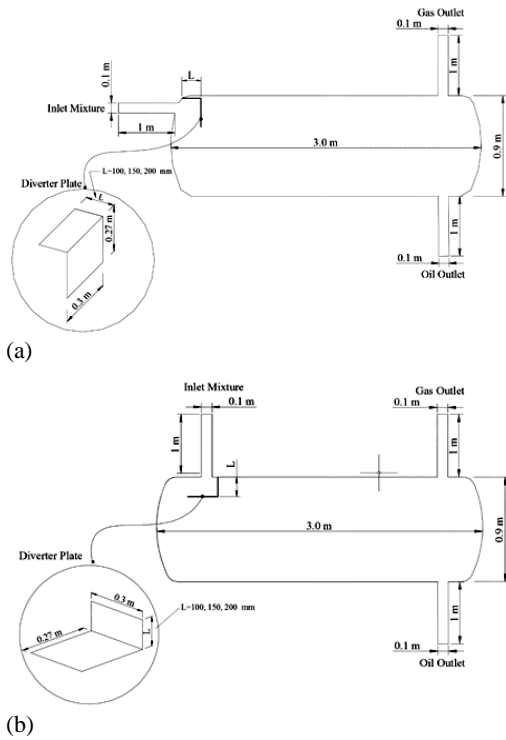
Geometry and dimensions of two different separator arrangement a) separator with side inlet pipe, b) separator with top inlet pipe.
